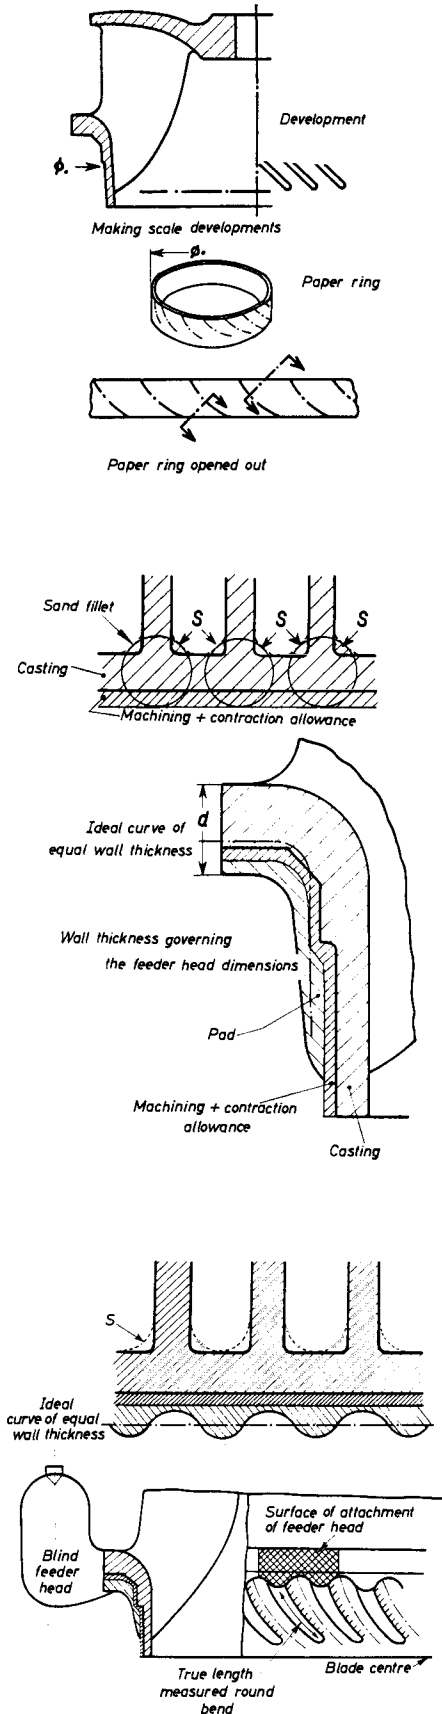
Padding a Francis turbine wheel. Drawing partly schematic.
